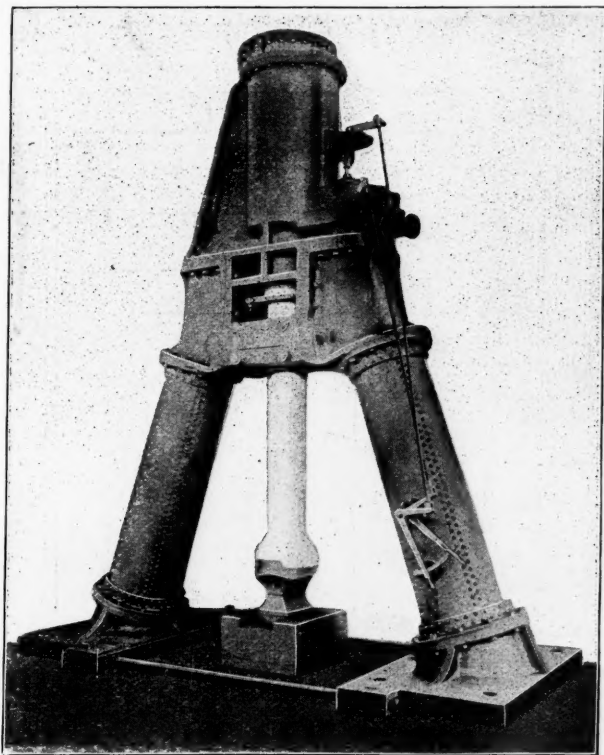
Twelve-Ton Steam Hammer for Forging Solid Steel Wheels.
